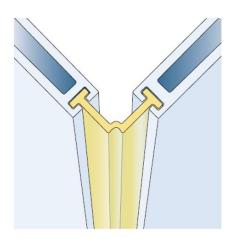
Extruded profiles connected with a flexible material. (Sapa Group AB.,
